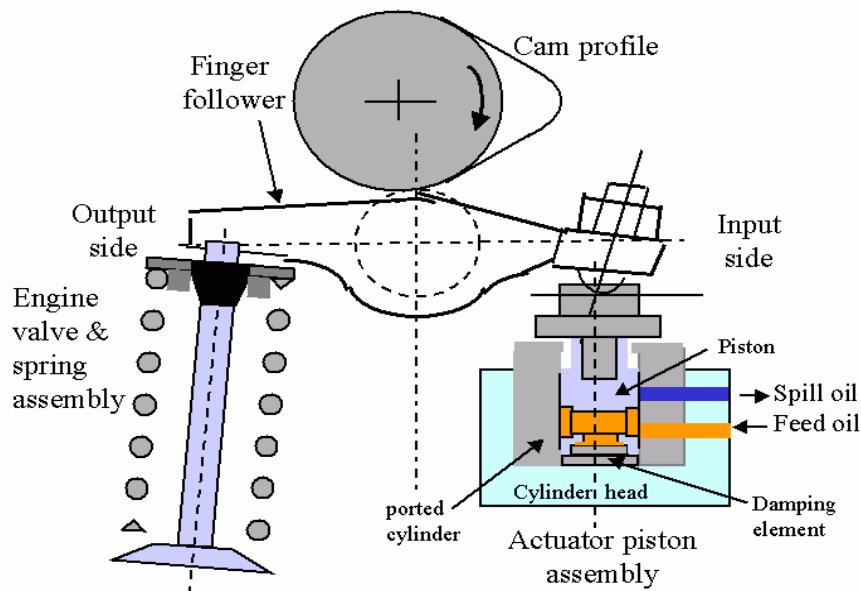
Design Layout of a Semi-floating Electro-hydraulic Valve Train
